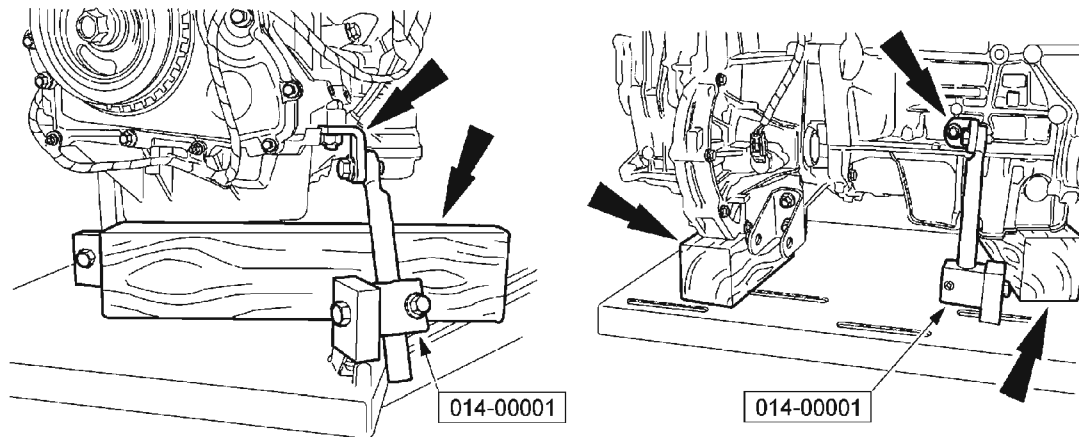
Removing Oil Pan-To-Bell Housing Bolts
